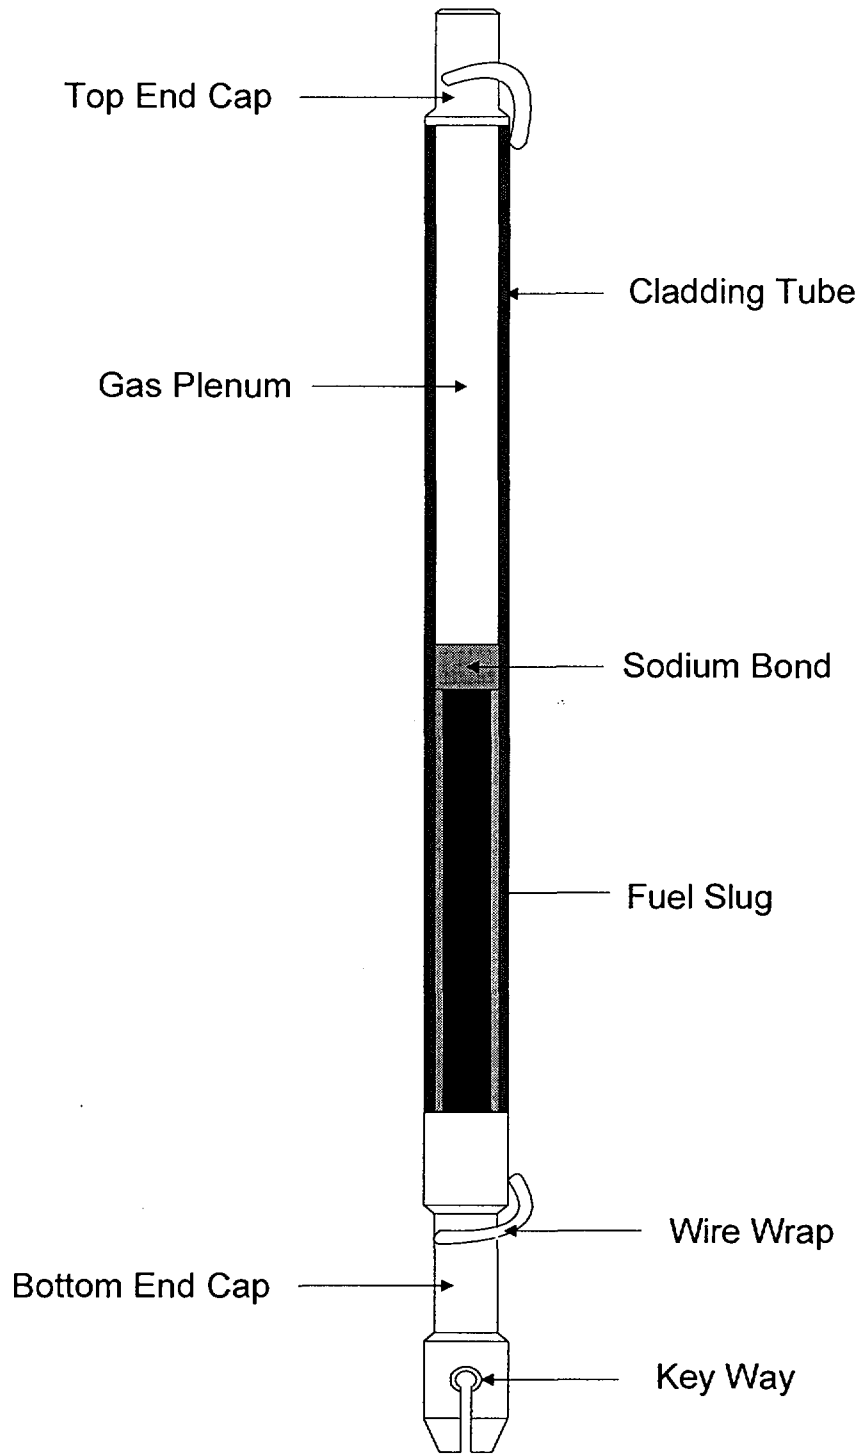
Schematic of the KALIMER Blanket Fuel Pin.
